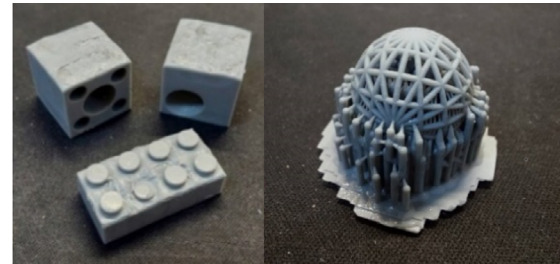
(a) shows horizontally printed objects that were lifted to a height of 5 mm on supports. This 'run-out' of layers occurs when the supports do not hold the printed layer sufficiently and it begins to fall before the next layer is printed. These defects can be avoided by printing objects flat on the platform, by rotating them at an angle, or by adding more supports of appropriate parameters.
